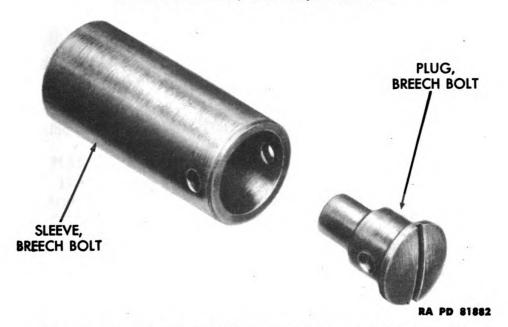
Breech Bolt Sleeve and Breech Bolt Plug of Winchester Rifle, Cal. .22, Model 75
